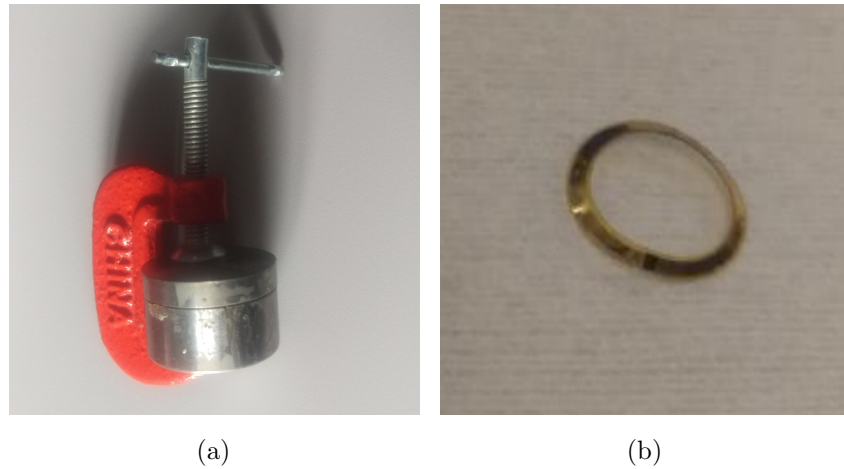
(a) Photograph of the closed mold pair. (b) Photograph of the spherically deformed sensor bent by molding.
